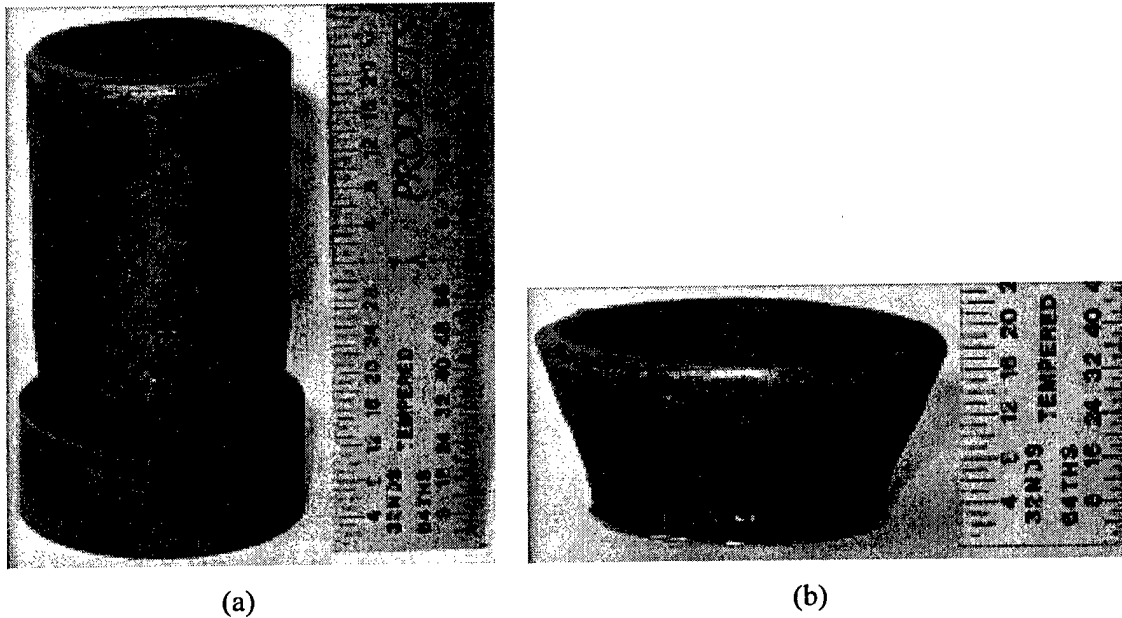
Test parts: (a) part in form of a cylinder; (b) part in form of a cone
